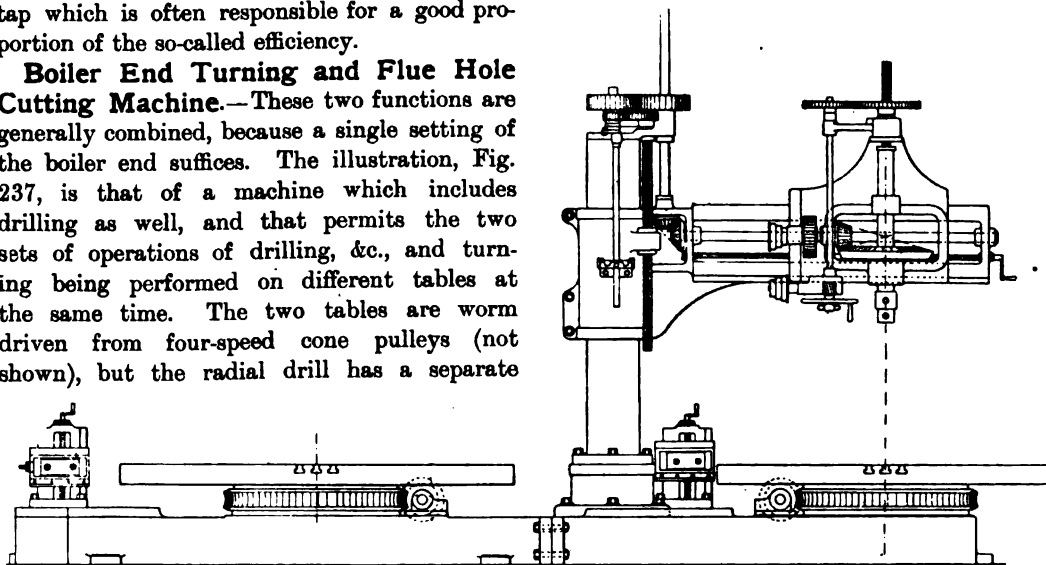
Boiler End Turning and Flue Hole Cutting Machine. (Rushworth & Co.)
